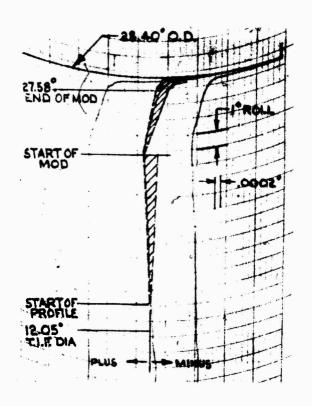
Involute Profile Trace of Tail Rotor Driven Pinion (P/N 204-040-762-1).
